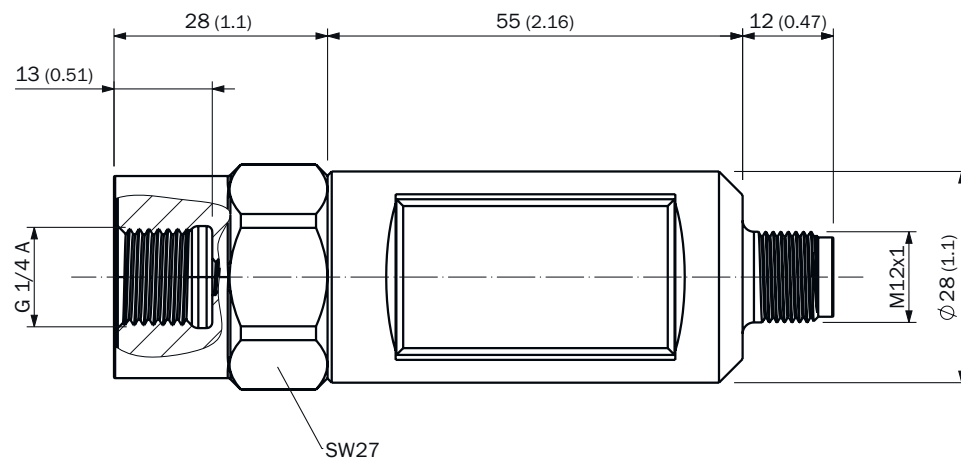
Dimensioned drawing for PBST-xxxxxxG2xxxxxxx
